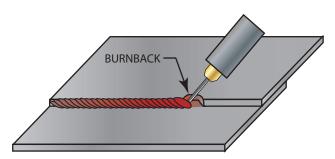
Welding too slowly or not having the correct gun angle can result in the thin edge burning back on lap joints.
